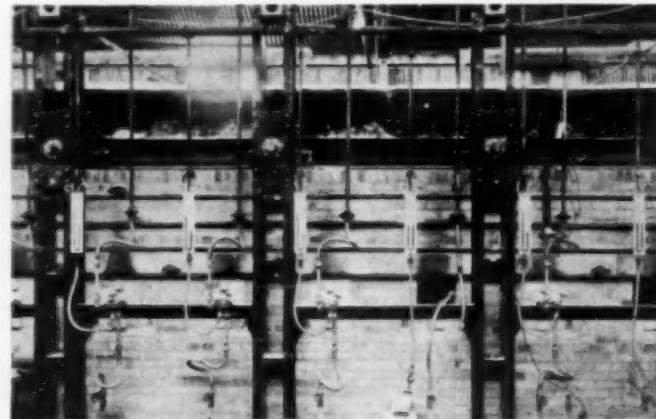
Preheating Zone Looking Toward Ventibule Showing Wall Baffles, Exhaust Openings and Sand Seal
